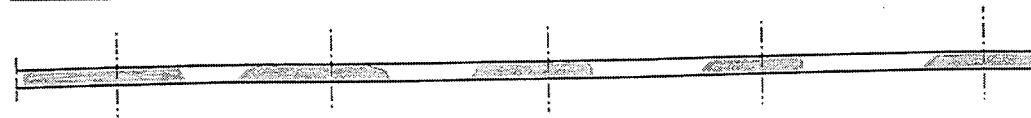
Fatigue cracks at all rivet holes (MSD) in lap joint specimens with 4 or 8 rivets in each row.
